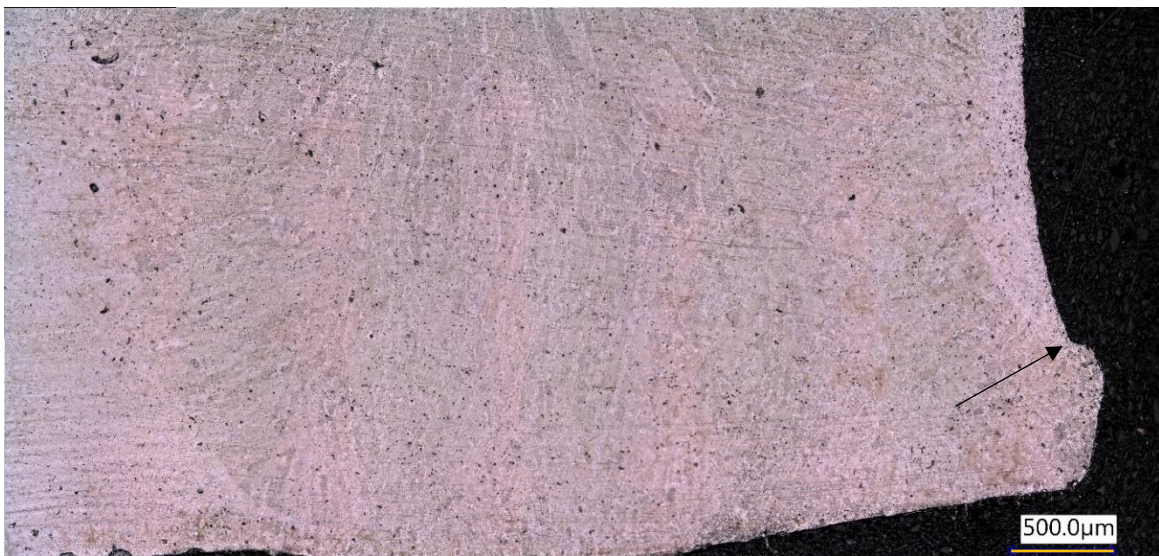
Specimen 0-2, the beadweld, magnification x250. Crack initiation point marked with the arrow.
